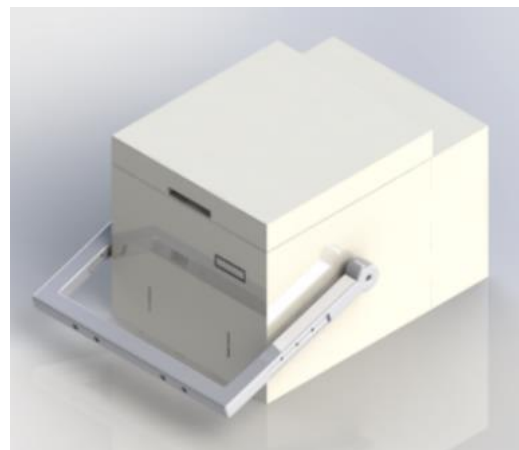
Illustration drawing of vaccine refrigerator carrier
